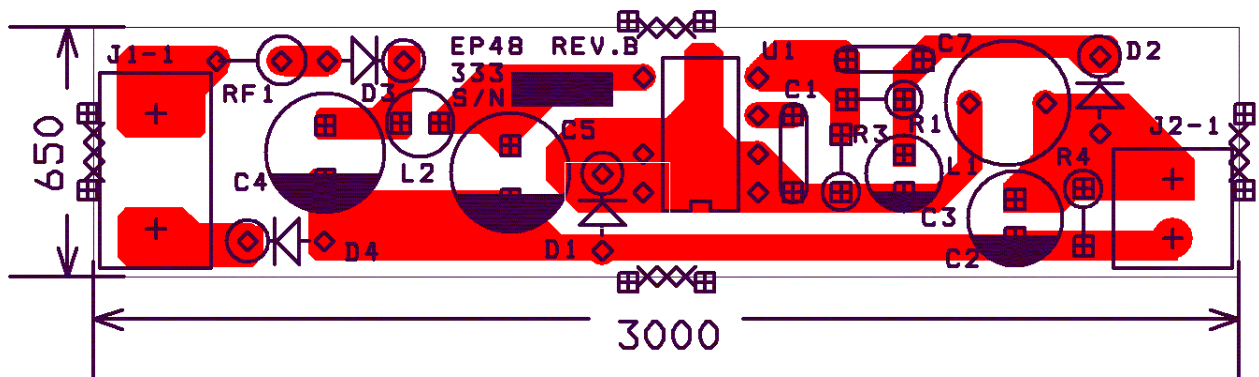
EP48 Printed Circuit Layout (Dimension 0.001 Inches).
